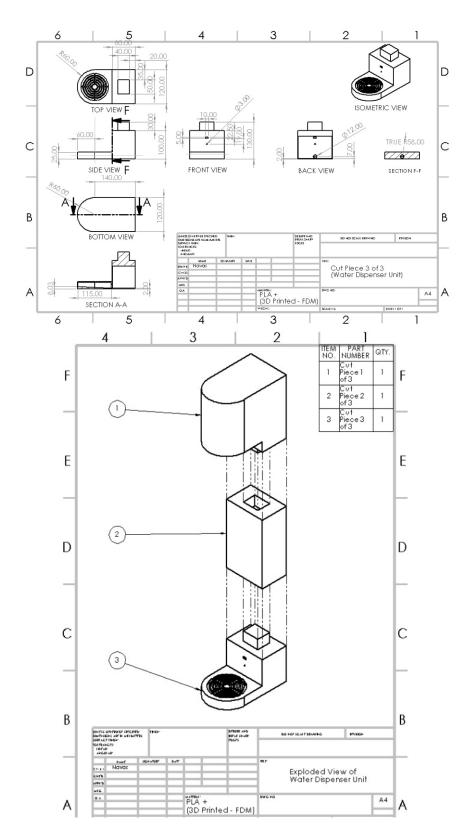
Engineering Drawings in the following order (1. Cut Piece 3, 2. Exploded View of Water Dispenser Unit made of Cut Pieces)
